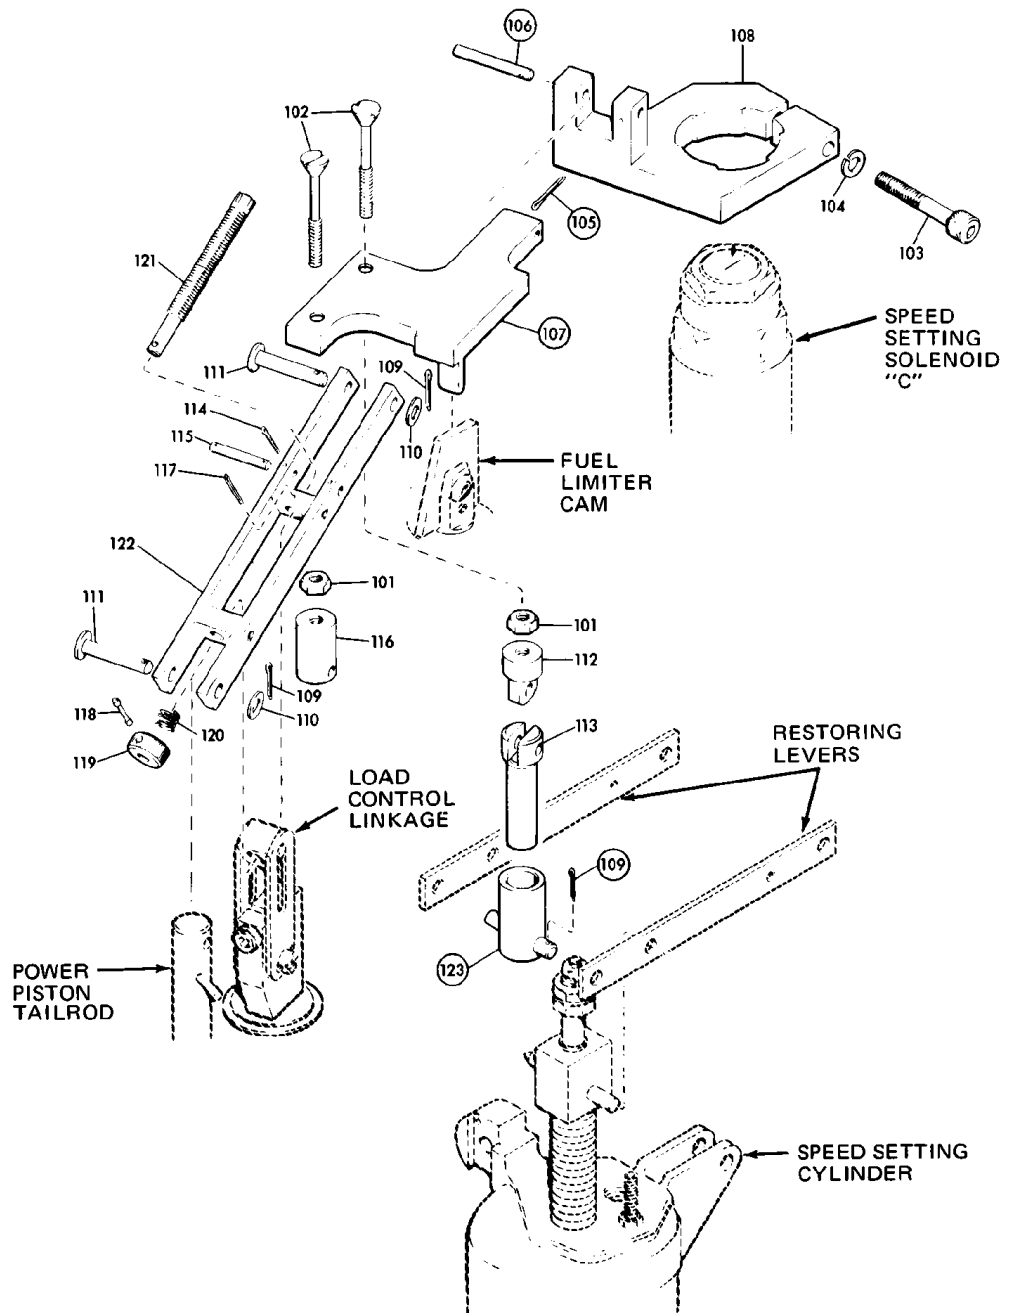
Exploded View, Optional Two-Slope Load Control Bias Linkage
